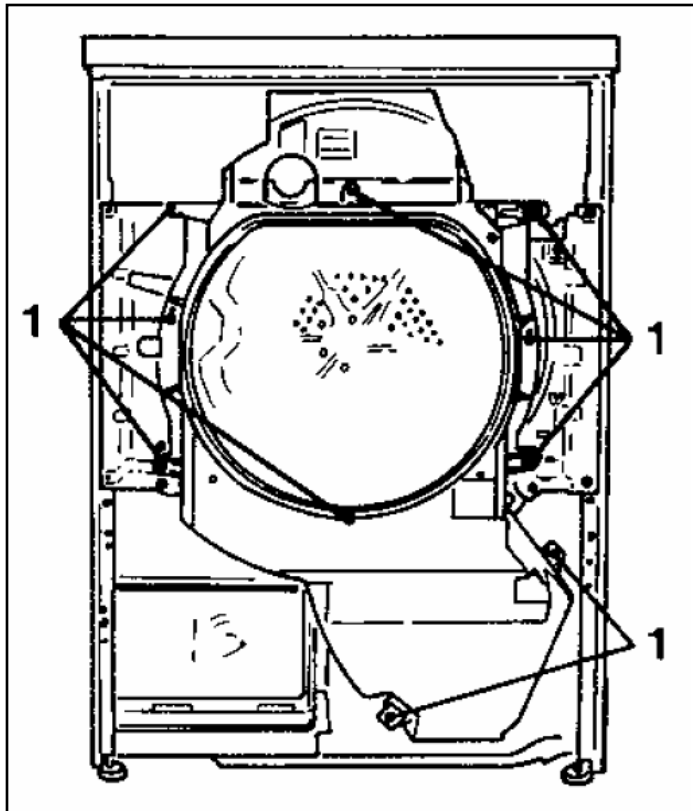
Fan Unit with Drum Drive Motor Removal
